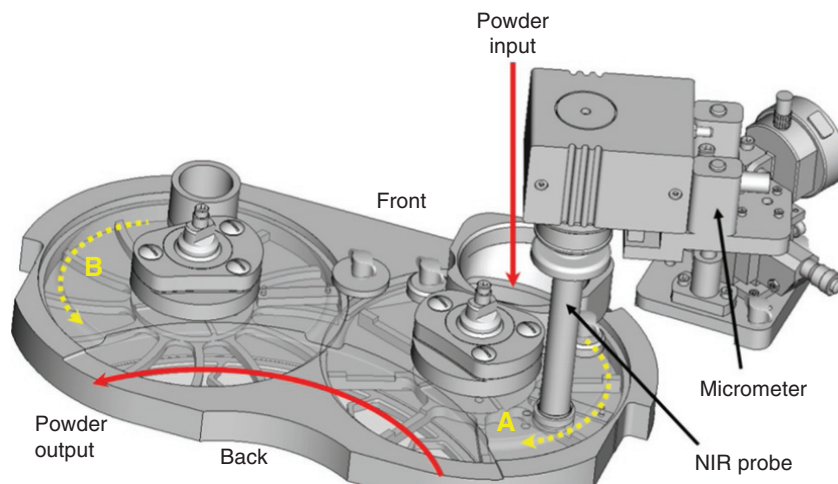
The GEA Courtoy MODUL P tablet press feed frame with integrated NIR system. *Source:* Courtesy of GEA Inc.
